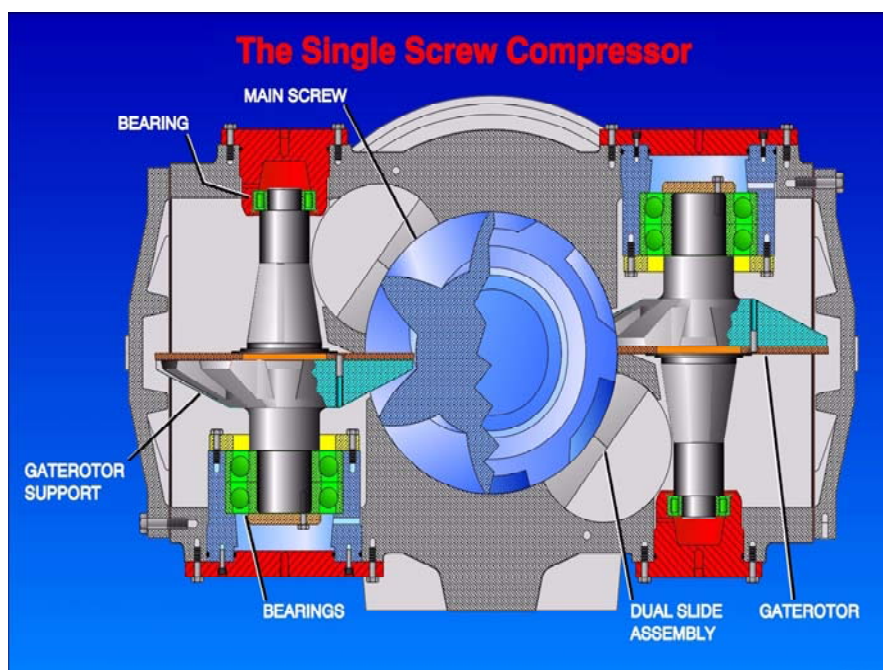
An oil-flooded single screw compressor consisting of one main rotor and two gate-rotors. The compressor has an all rolling bearing arrangement (sketch from a joint Vilter & SCFM presentation).
